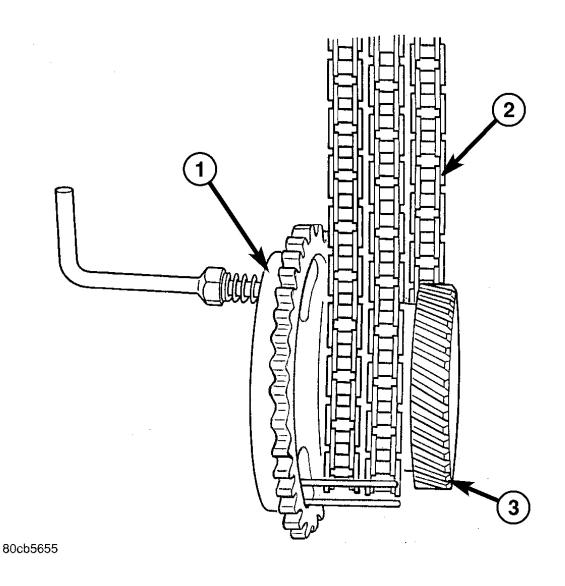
Special Tool 8429, Camshaft Chain & Crankshaft Timing Gear Courtesy of CHRYSLER LLC
